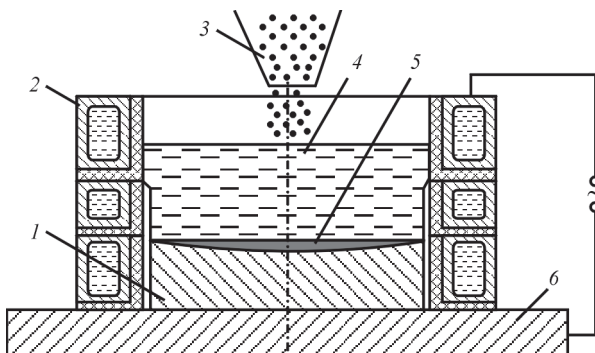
Scheme of surfacing of dies in CCM using discrete filler in form of chips: 1 — die being deposited; 2 — current-conducting mold; 3 — filler (chips); 4 — slag pool; 5 — metal pool (metal being deposited); 6 — bottom plate
